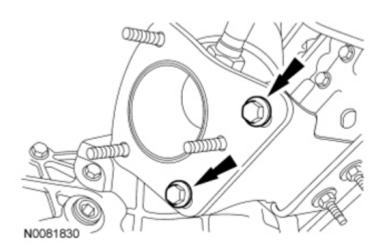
Locating Bolts And Transfer Case-To-Engine Bracket Courtesy of FORD MOTOR CO.
